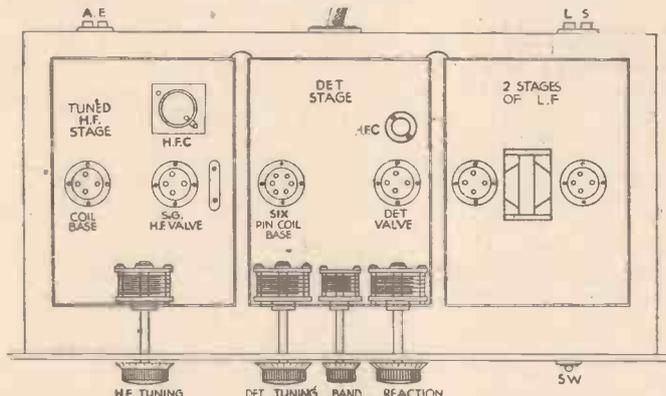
A plan of the chassis assembly shown in Fig. 2 with the screen covers removed.
